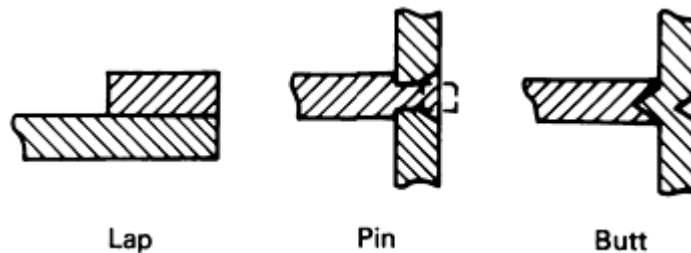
RECOMMENDED JOINT CONFIGURATIONS USED IN AUTOMATIC FORGE WELDING APPLICATIONS. SOURCE: REF 1
